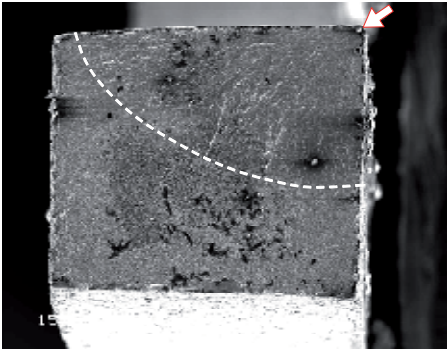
SEM photograph of fracture surface for rolled SMA in pulsating-plane bending fatigue
